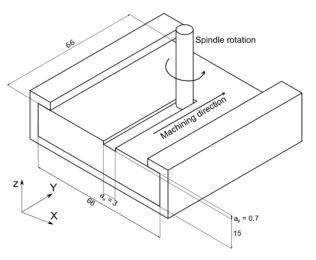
Schematic assembly for the slotting tests dimensions in mm.
